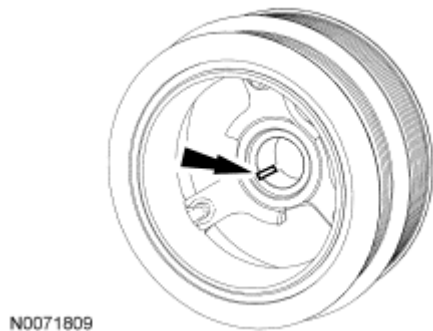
Applying Silicone Gasket & Sealant To Woodruff Key Slot On Crankshaft Pulley
